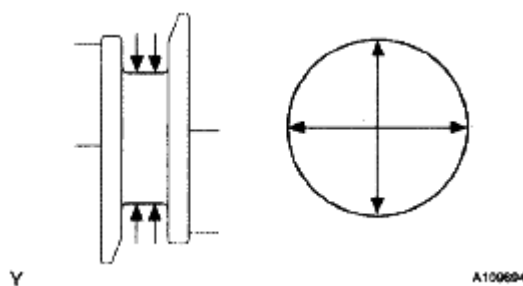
Checking Main Journal For Taper And Out-Of Round
